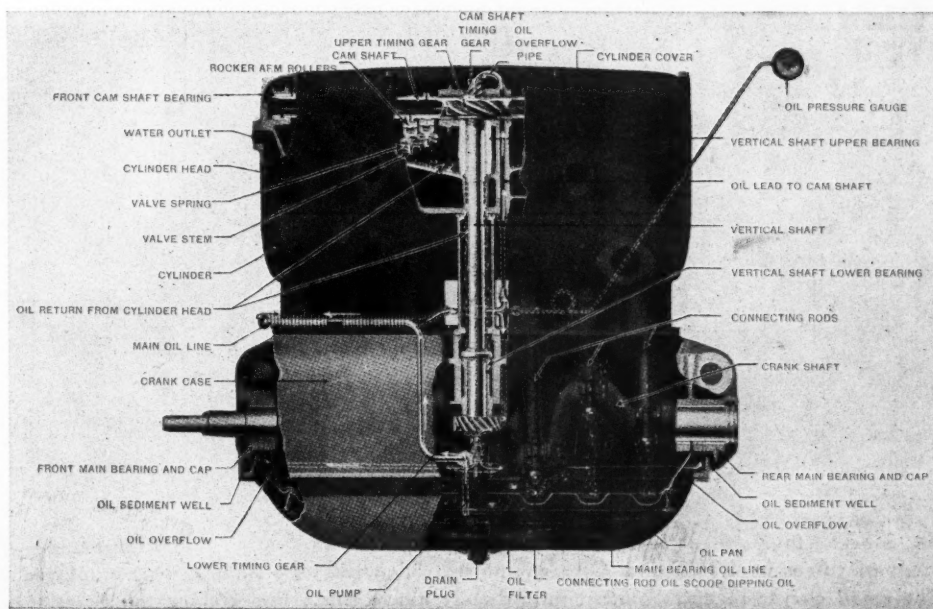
Lubrication as used on the 1916 Chalmers 6-40 engine
